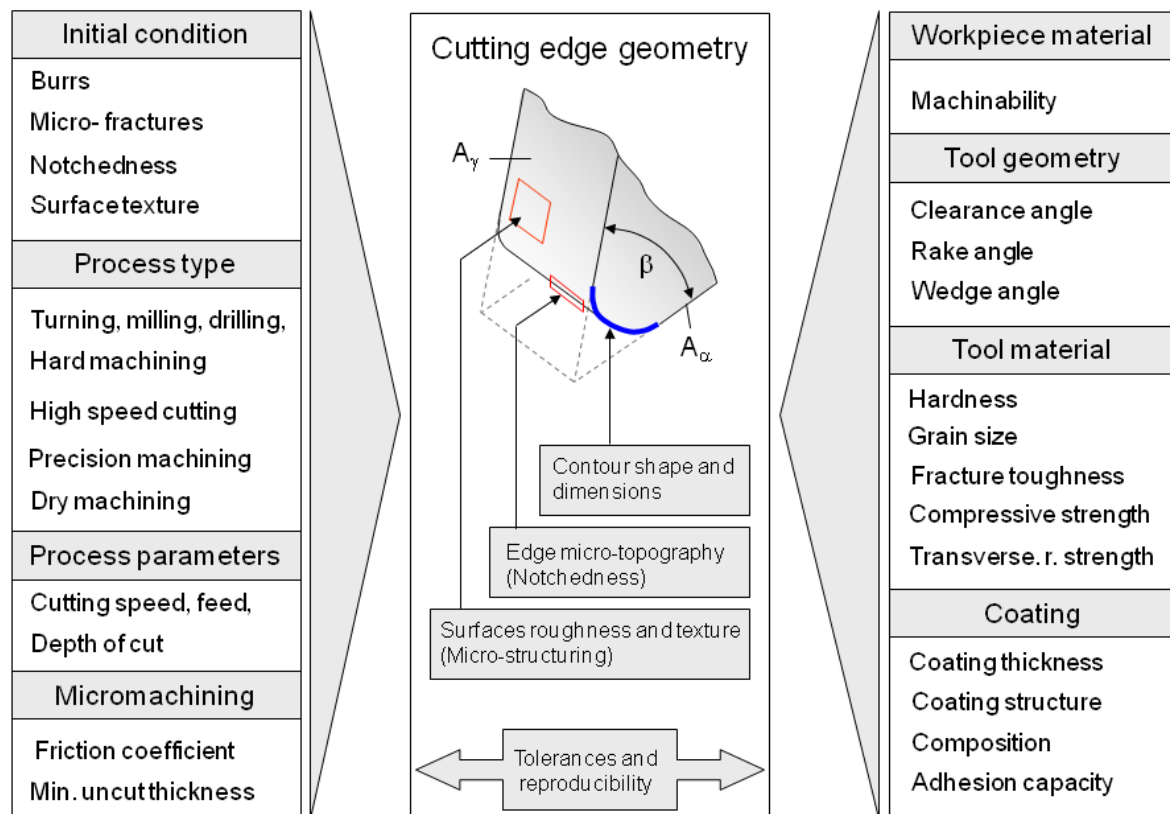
Factors influencing the selection and design of the cutting edge geometry
